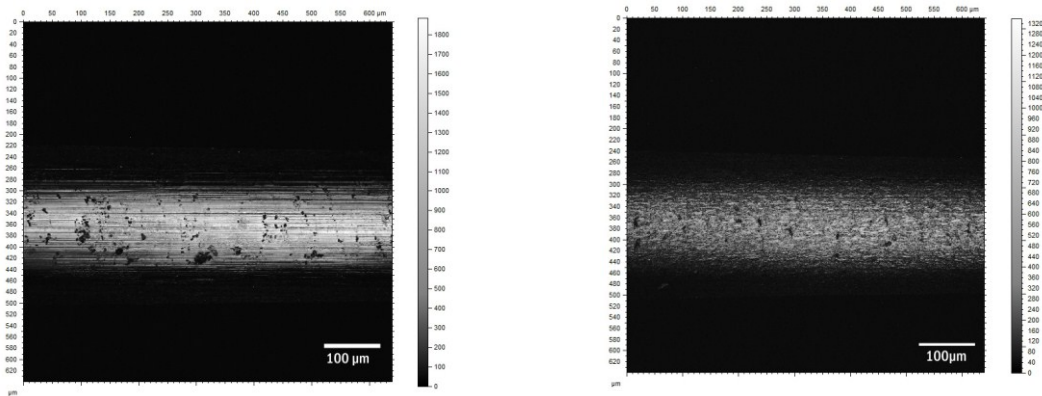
Thread crests of die A4. (Left) New thread. (Right) Used Thread.
